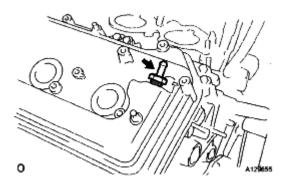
Identifying Ventilation Valve Sub-Assembly Courtesy of TOYOTA MOTOR SALES, U.S.A., INC.
